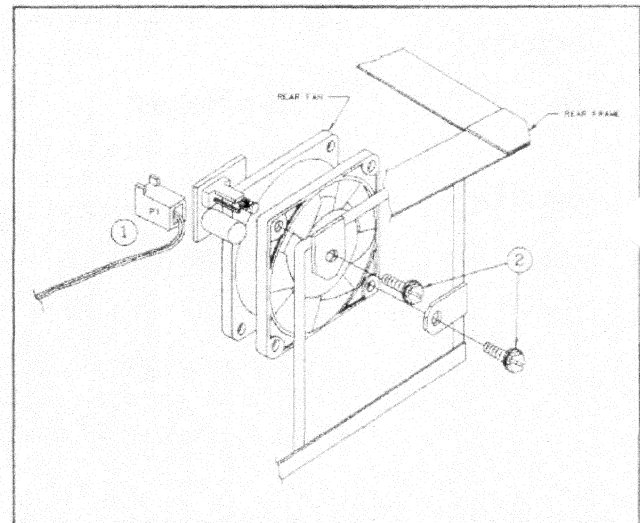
Rear Panel Card Rack Fan Removal
